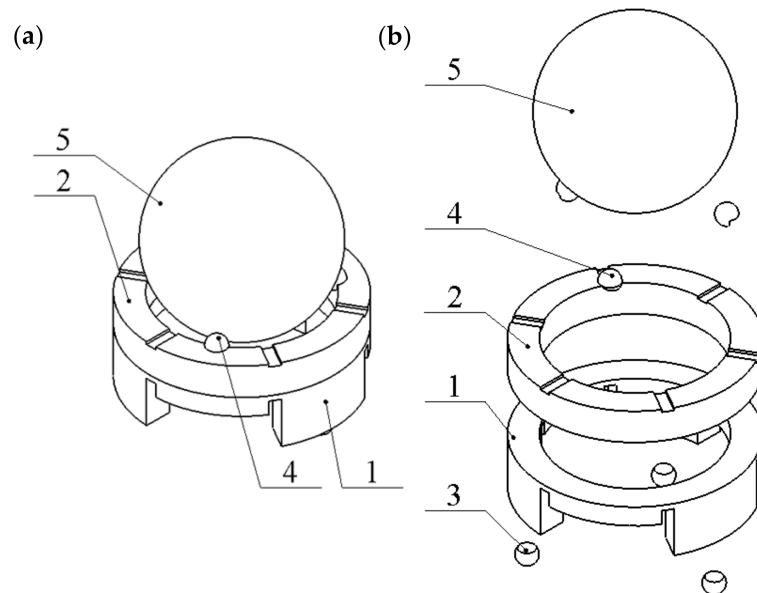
Design of the actuator: (a)—assembled view; (b)—exploded view; 1—beryllium bronze cylinder; 2—piezoceramic ring; 3—spherical contacts used for linear motion; 4—spherical contacts used for angular motion; 5—spherical payload.
